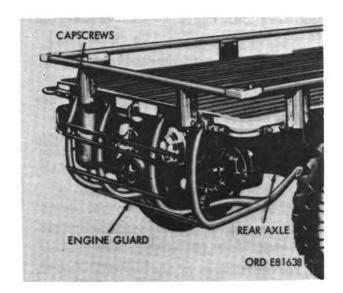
Removing or installing engine guard— M874A8 and M874A5—exploded view.
